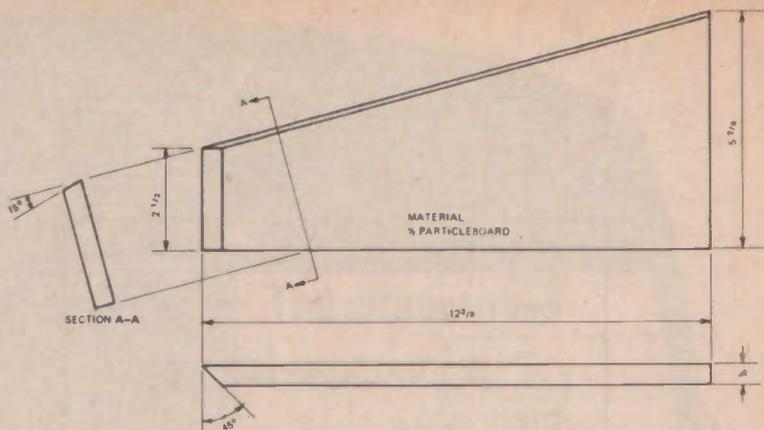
Cabinet sides — two required. Note that boards should be mirror image of each other, that is, chamfers should have opposite slope.
